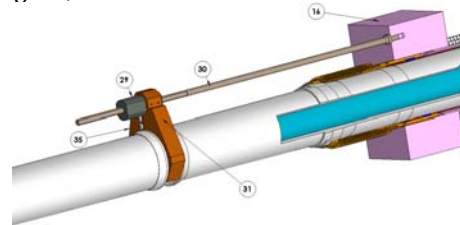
Schematic representation of the clamping and fastening pieces mounting for the rod positioning
